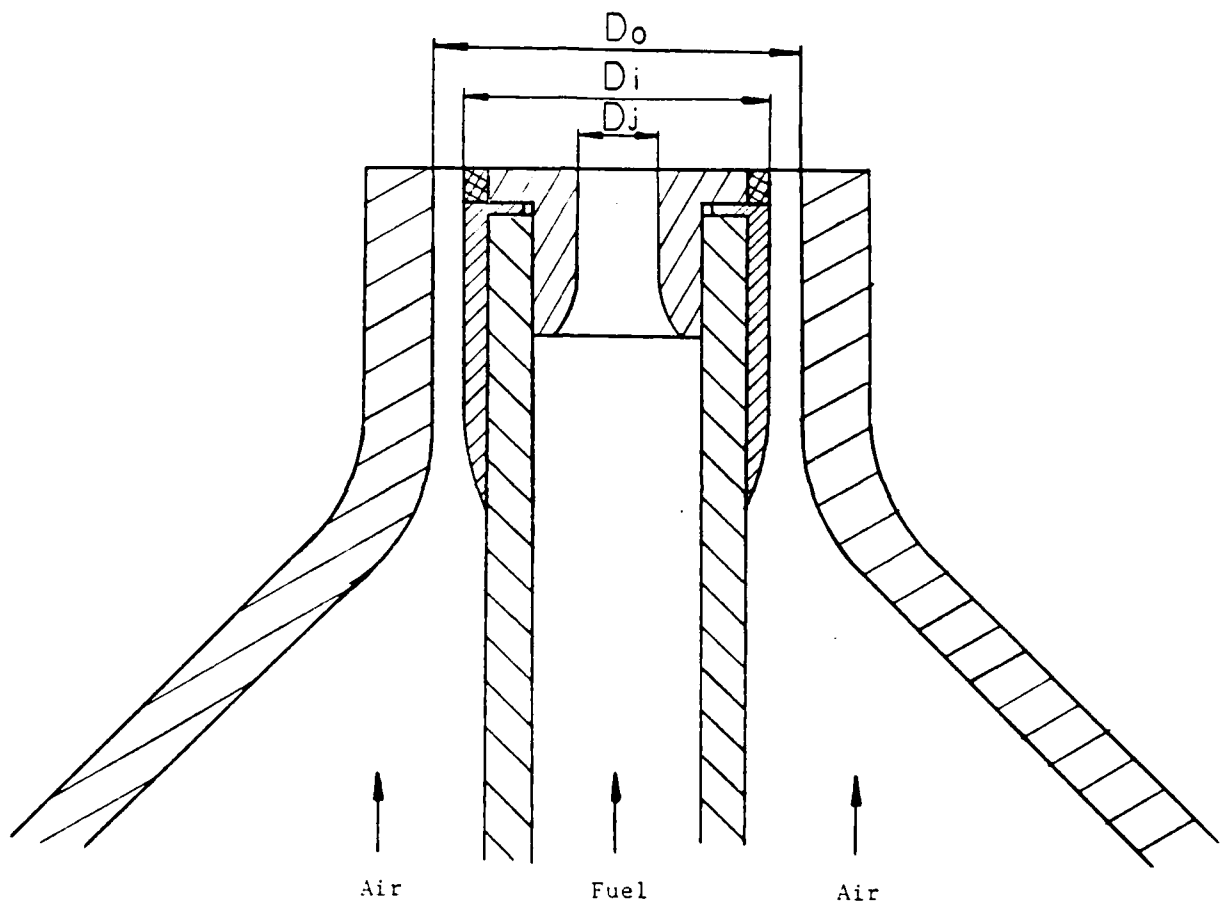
Schematic drawing of fuel and air nozzles used in Test II.
